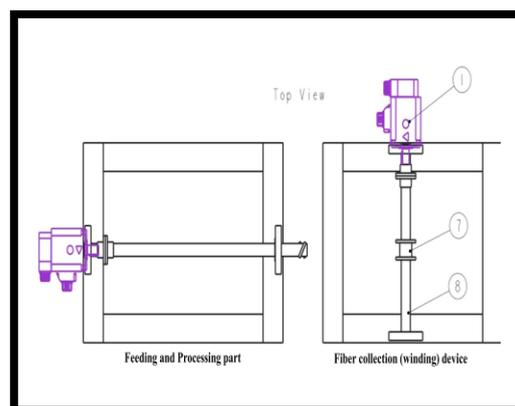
Line Diagram of the Machine – 1 specifically for extracting and yarn making – Top view
